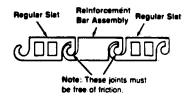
ENGAGING REINFORCEMENT BAR ASSEMBLY TO REGULAR SLATS.
